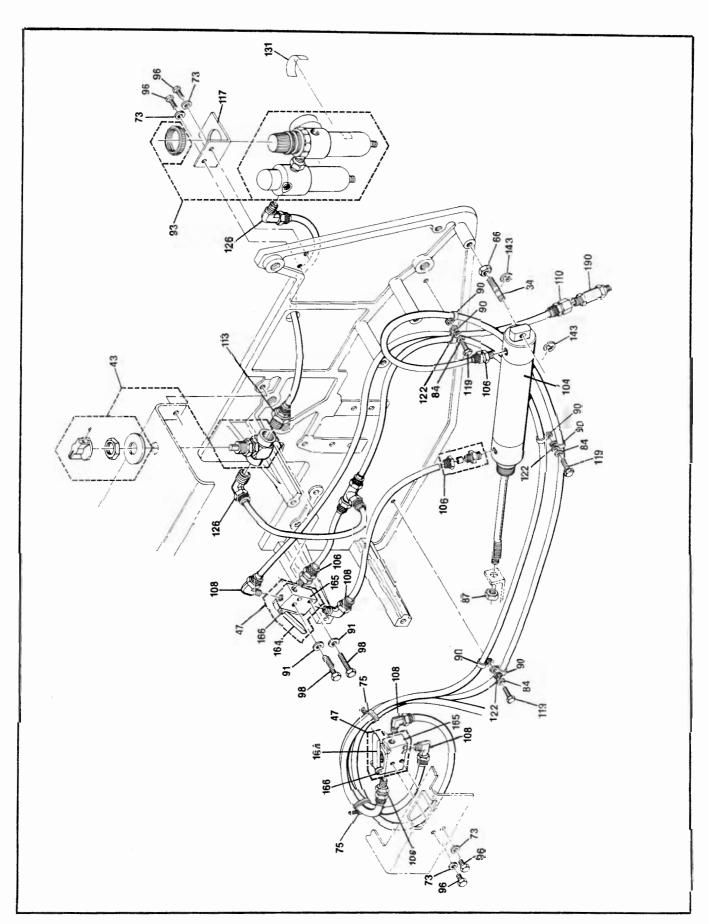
A - PNEUMATIC COMPONENTS (Serial Nos. 1500 to 1699) Refer to page 24 for Pneumatic Components Parts List.
